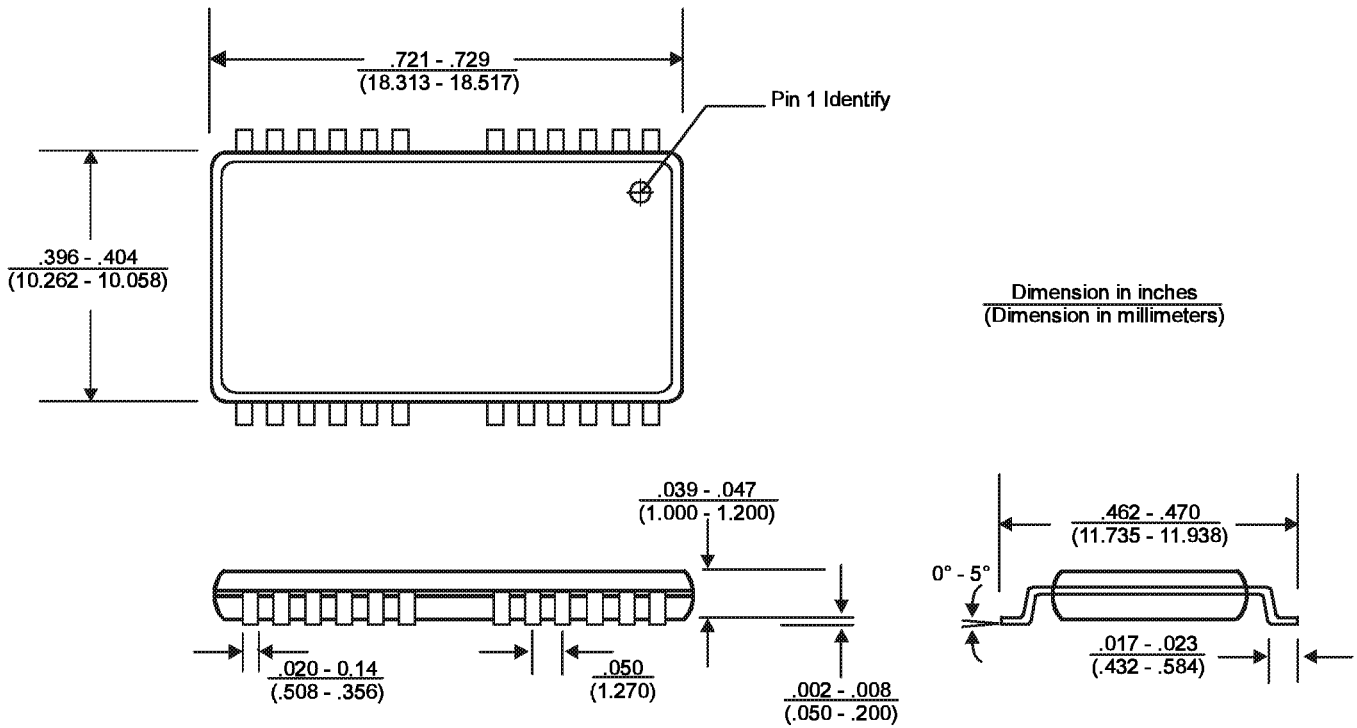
IS26F080A/26F160 24/28 TSOP II Package Dimensions
